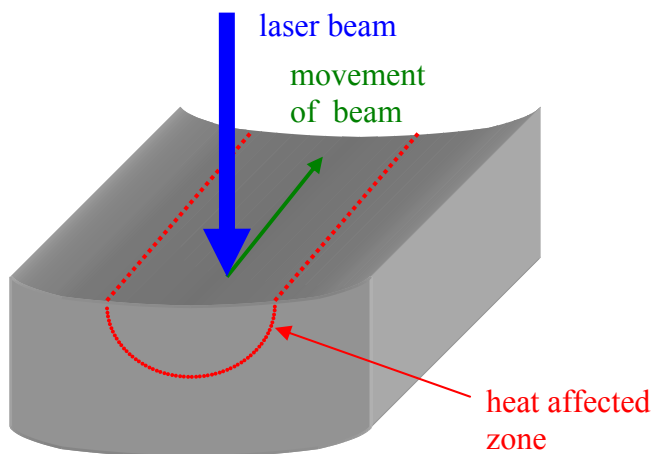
Scheme of the heat treatment of the laser hardened bearing surface
